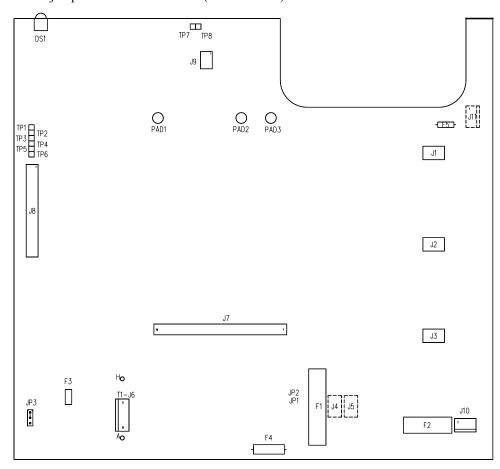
Ndrive HP Power Board Assembly (690D1597 Rev. 0)
